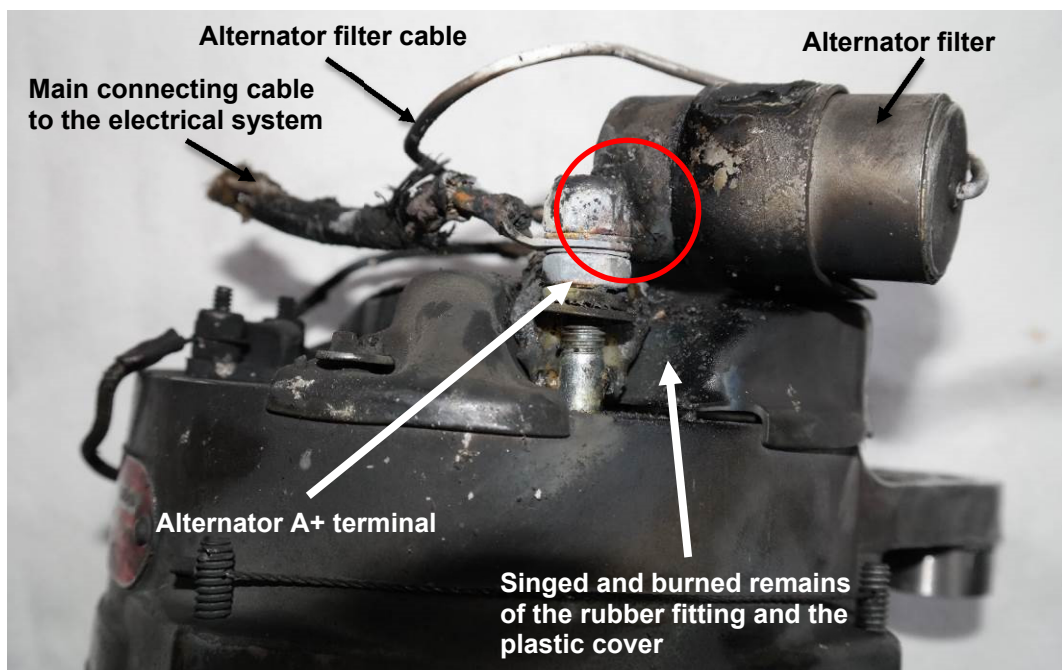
The alternator after removal, with A+ terminal, main connecting cable to the electrical system, cable to the alternator filter, alternator filter and the singed and melted remains of the rubber fitting and plastic cover respectively. The small distance between the alternator's A+ terminal and the alternator filter housing can be seen in the red circle.
